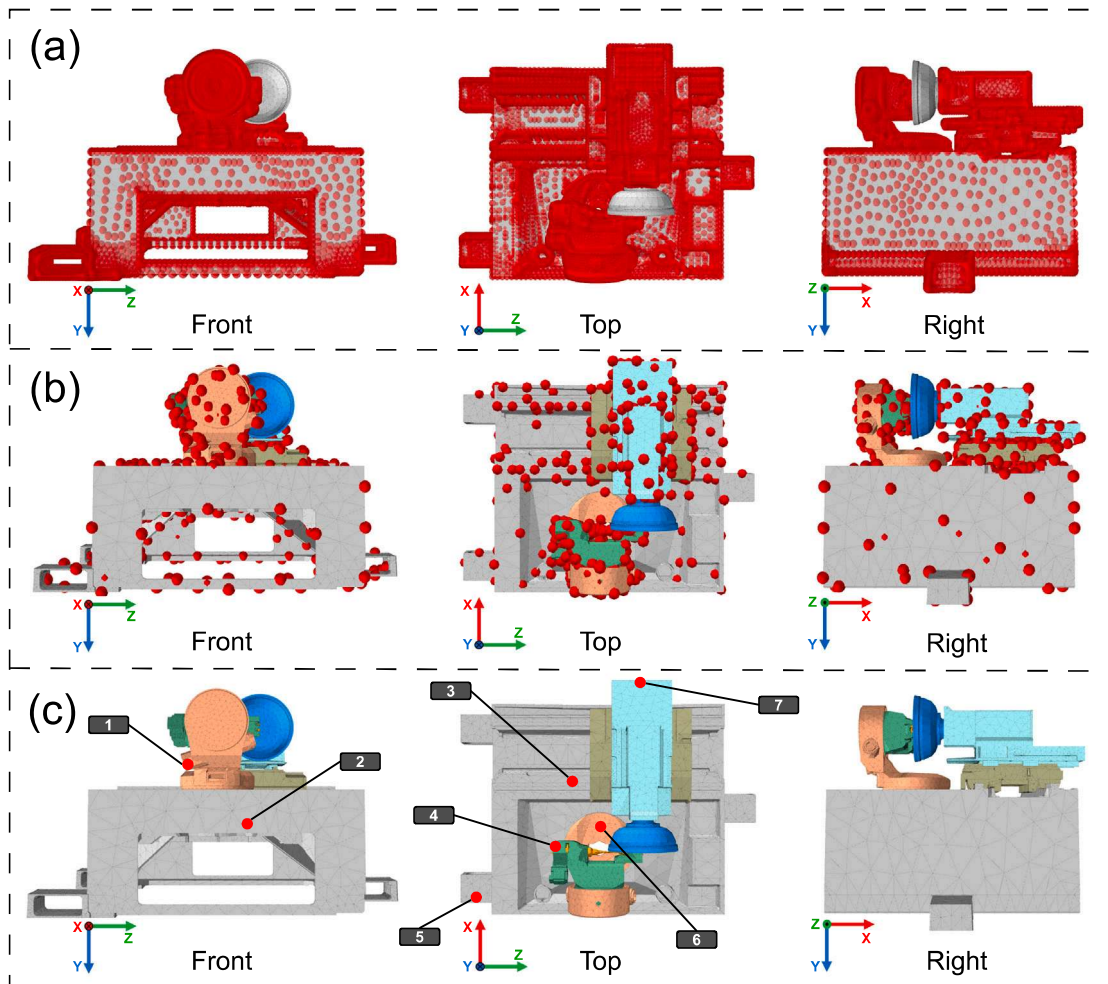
The top image (a) shows all possible sensor locations, so all surface mesh elements with the exclusion of the grinding wheel as well as the workpiece. Due to the large number of possibilities the numbers are reduced by SVD as a pre-selection which is shown in (b) and at last the Group LASSO is applied yielding the final sensor set containing 7 temperature sensors shown in (c).
